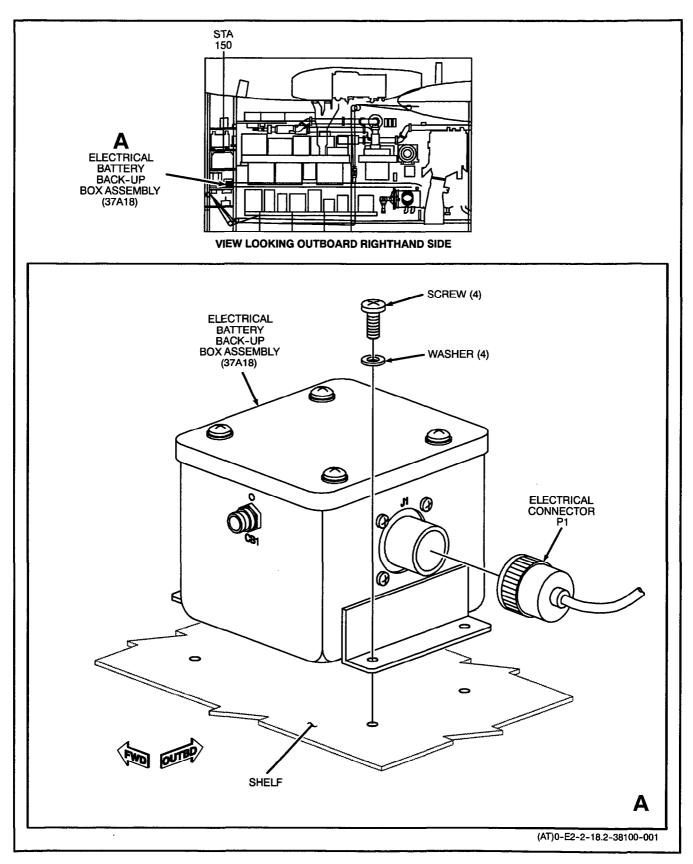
Removal and Installation of Electrical Battery Back-up Box Assembly (37A18)
